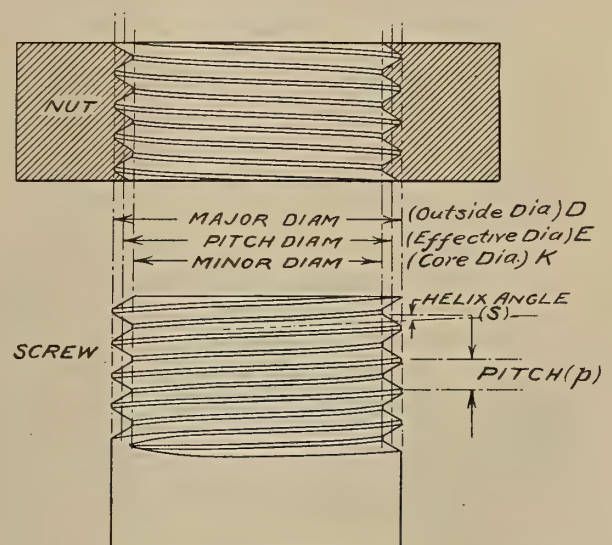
NUT AND SCREW INDICATING DIAMETERS AS EXPRESSED IN CONVENTIONAL DEFINITIONS
